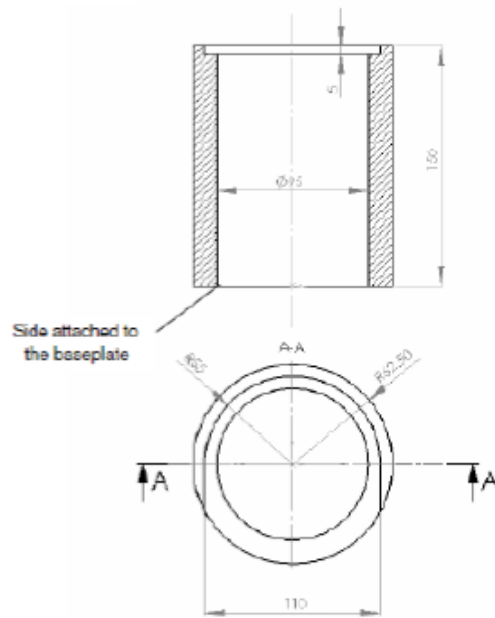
Supporting ring as a base for the guide rod head
